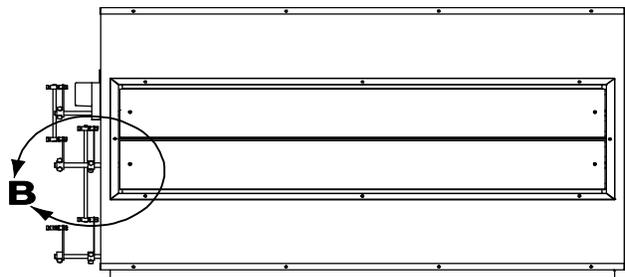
Linkage Assembly Side View (Sizes 16-80)
